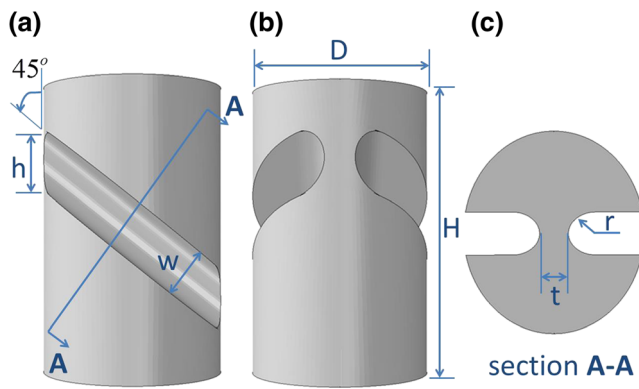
An SCS specimen with a circular gauge. a. Front view b. Side view. c. A cut view (A-A) perpendicular to the gauge inclination
